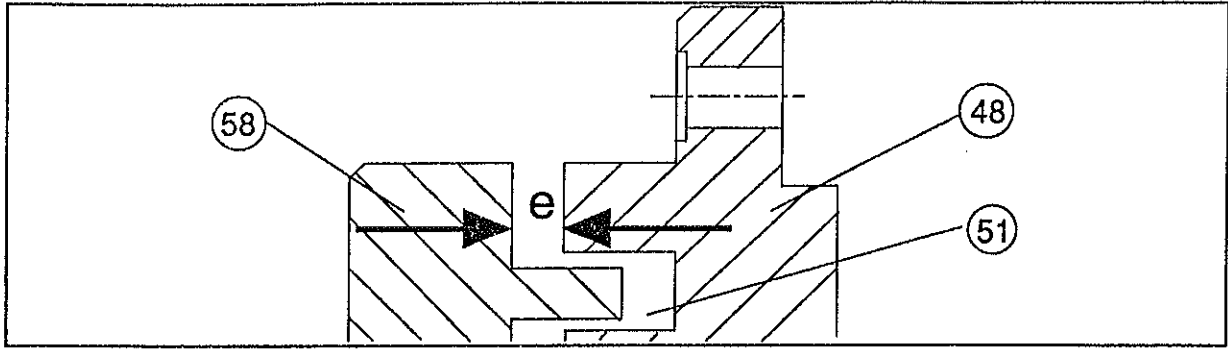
Clearance between dust flinger and rigid labyrinth seal
